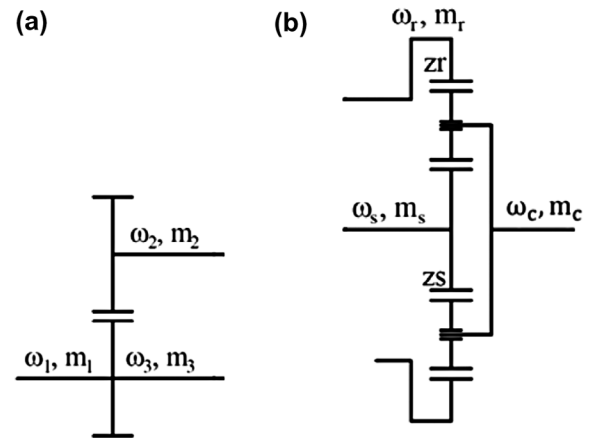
Schematic of the three-shaft ordinary gear (a) and the planetary gear (b).
